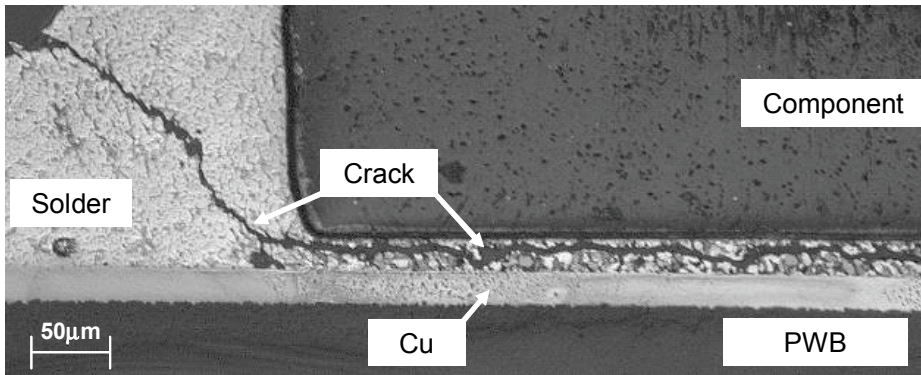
Microsection of SnPb solder joint of a ceramic leadless component after accelerated stress test. The crack path has fully developed. The electrical and mechanical properties of the solder joint are totally gone, or at least they are very unstable (refer to Fig. 6). Note that the electrical and mechanical connect might still exist in some part of the solder joint; figure shows only two-dimensional microsection of the solder joint.
